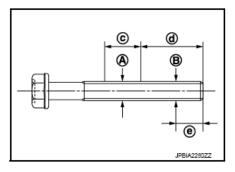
Locating Main Bearing Cap Bolt Outer Diameter Measurement Points Courtesy of NISSAN NORTH AMERICA, INC.
